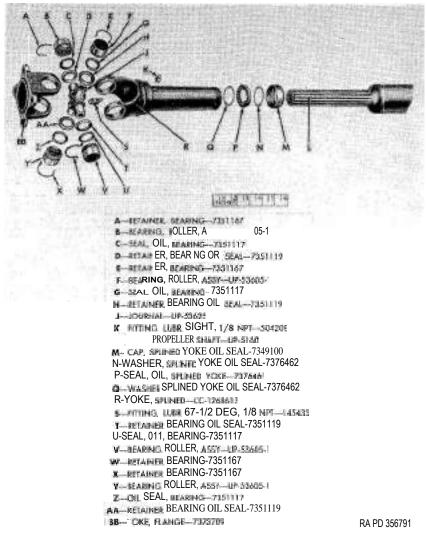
Universal joint and propeller shaft assembly—exploded view.
